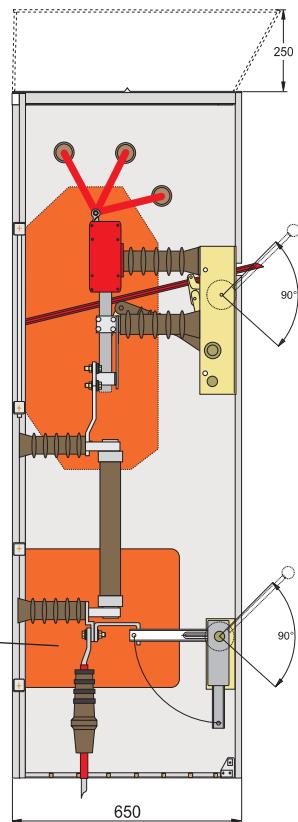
Side view of transformer feeder panel FT24-606519-27 with switch disconnector-fuse combination H27 SuT
